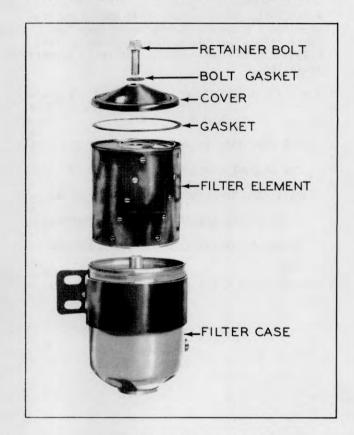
Engine Oil Filter C A U T I O N START ENGINE, RUN AT IDLE FOR A FEW MINUTES, CHECK COVER AND COVER SCREW FOR LEAKS.
